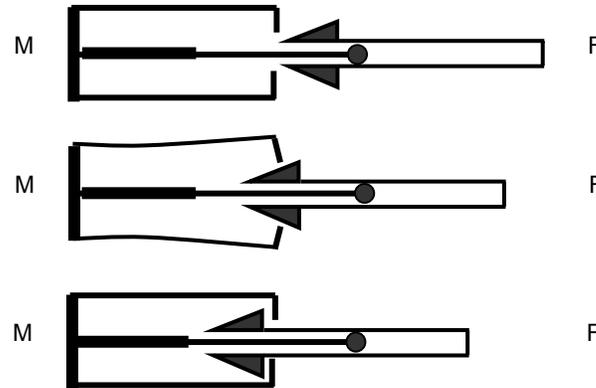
Locking mechanism of Fig. B.18 shown with a thin guide member having a knob on its end to minimize friction during insertion of parts. The upper sketch shows the connector halves during insertion but before engagement. Center: Insertion showing tapered ends of F deflecting the ends of M. The lower sketch shows the connector halves engaged.
